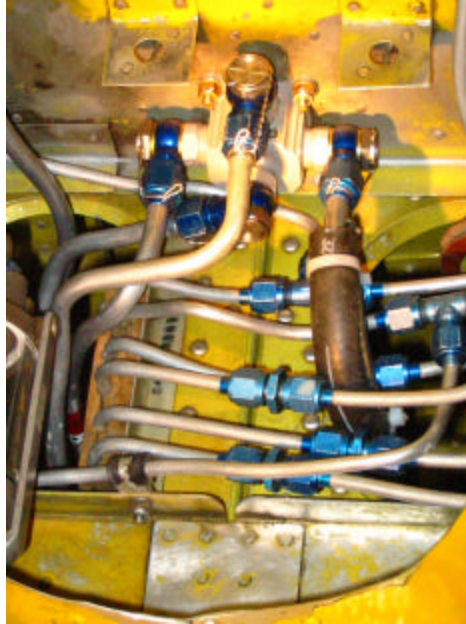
Sample Installation Looking Forward From Cockpit Floor
